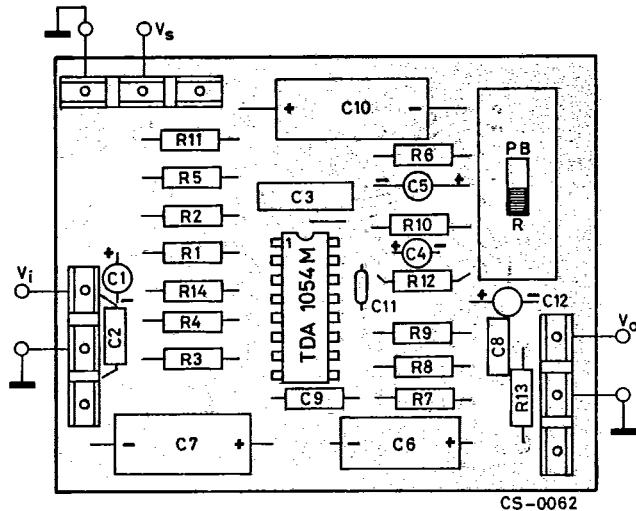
P.C. board and component layout for the circuit in fig. 18 (1:1 scale)
